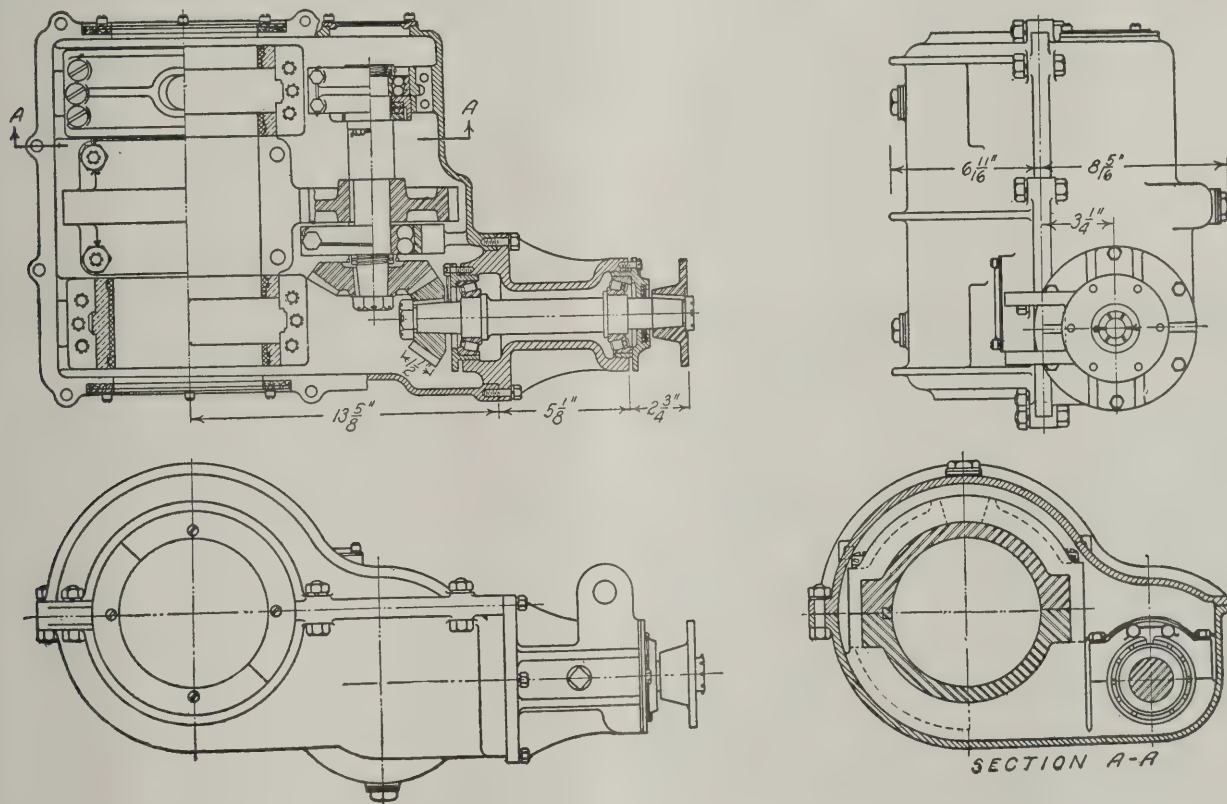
Assembly Drawing of Main Part of Gould Drive
